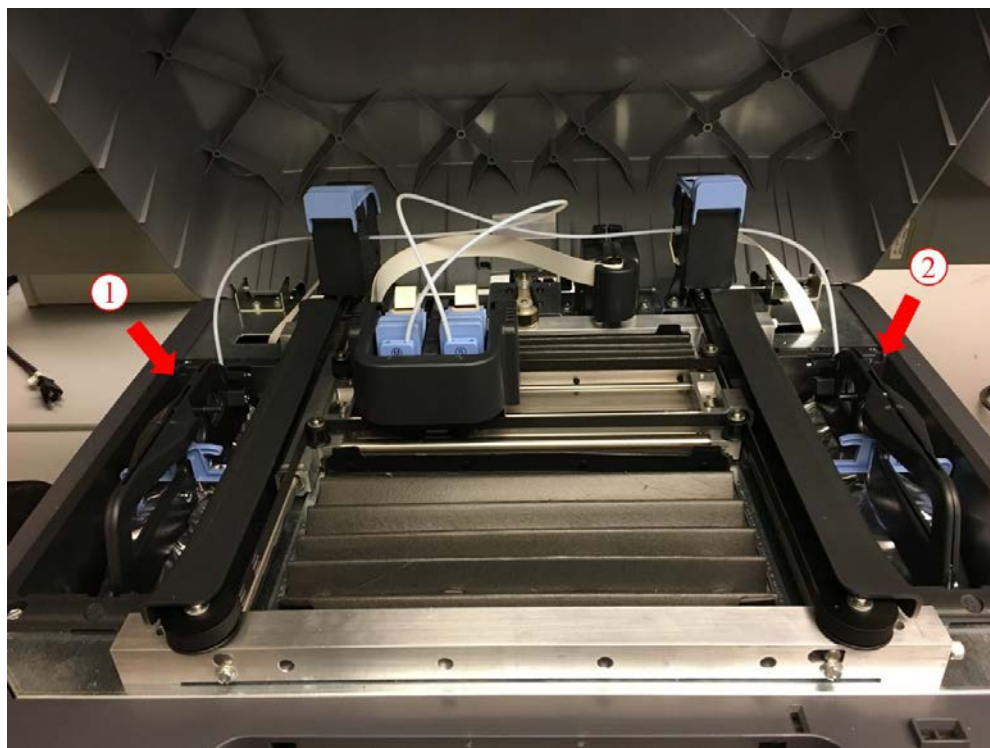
View underneath the top lid of the 3D-printer: 1. modeling material print engine, 2. support material print engine.
